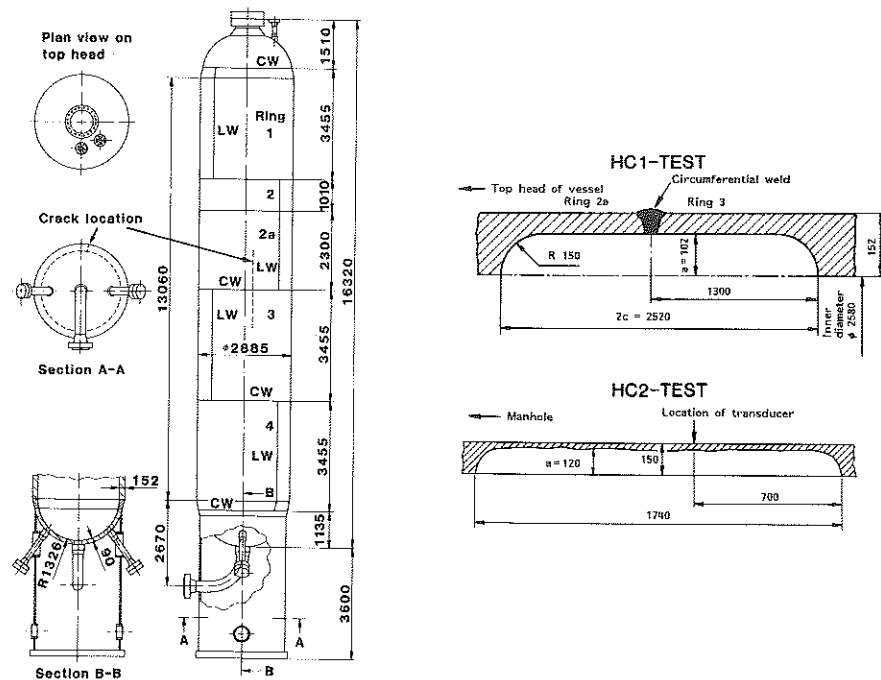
Decommissioned HC reactor pressure vessel of an oil refinery plant and dimensions of the axial surface flaw produced into the pressure vessel. CW, circumferential weldment; LW, longitudinal weldment
